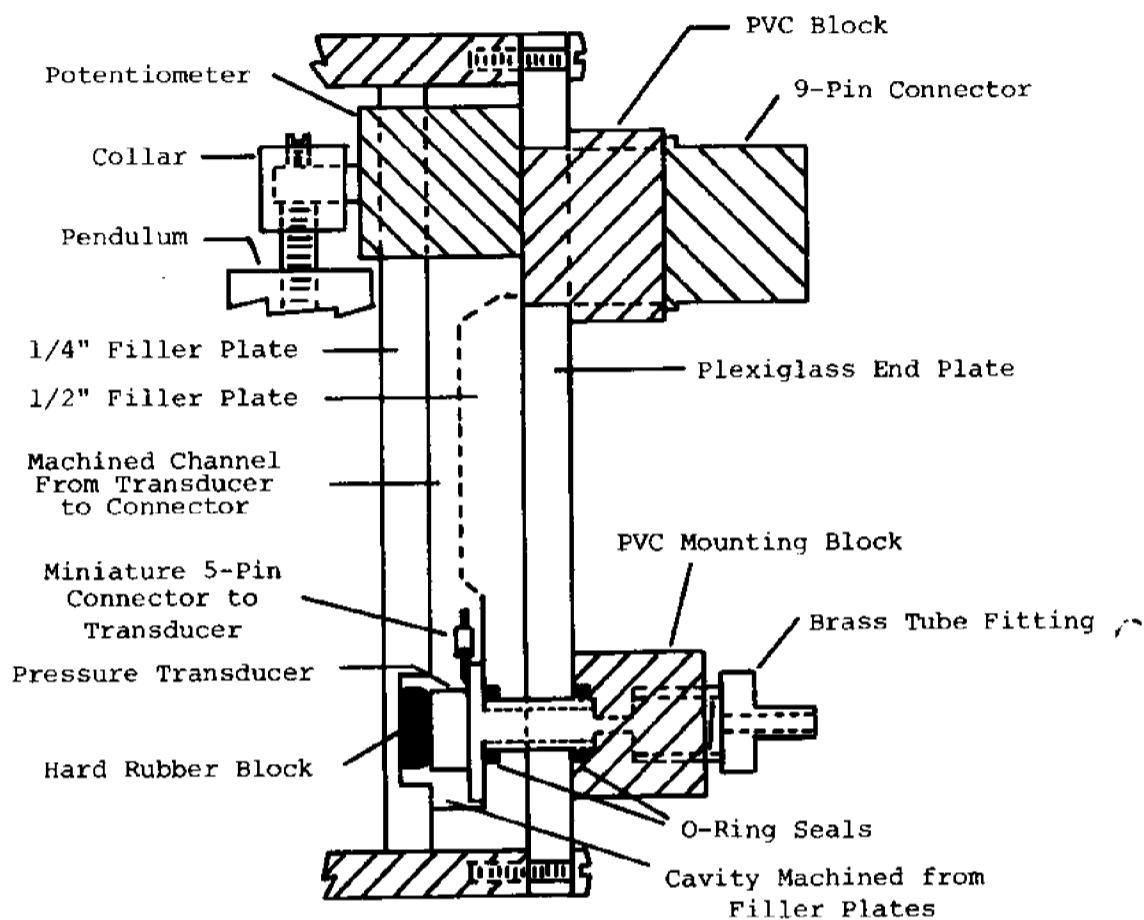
(cont.) Interior Detail of Pressure Transducer Mounting Technique in Multi-Sensor Package
